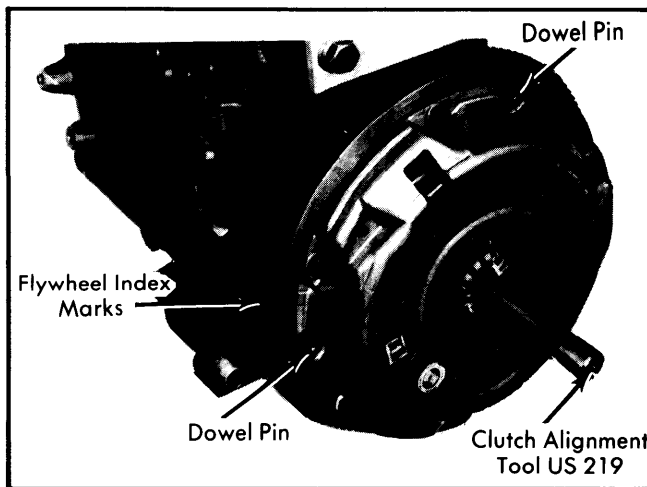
Aligning Clutch Assembly Reference Marks for Reinstallation
